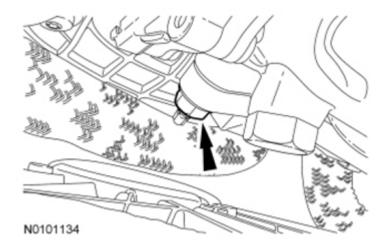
Locating Nut And A/C Tube Courtesy of FORD MOTOR CO.
